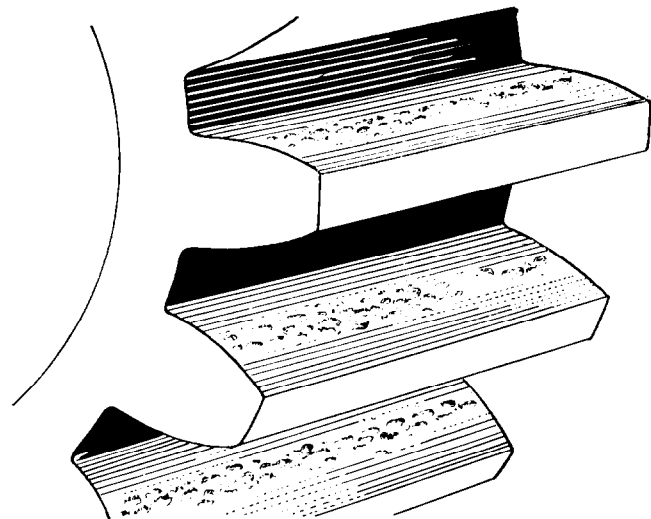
Destructive Pitting*. Rough tooth surfaces may have many high spots or hard spots and may pit so badly that too much of the load-carrying surface is rendered ineffective. When this occurs, the increased loading of the remaining surface causes further pitting until the working areas are destroyed.
